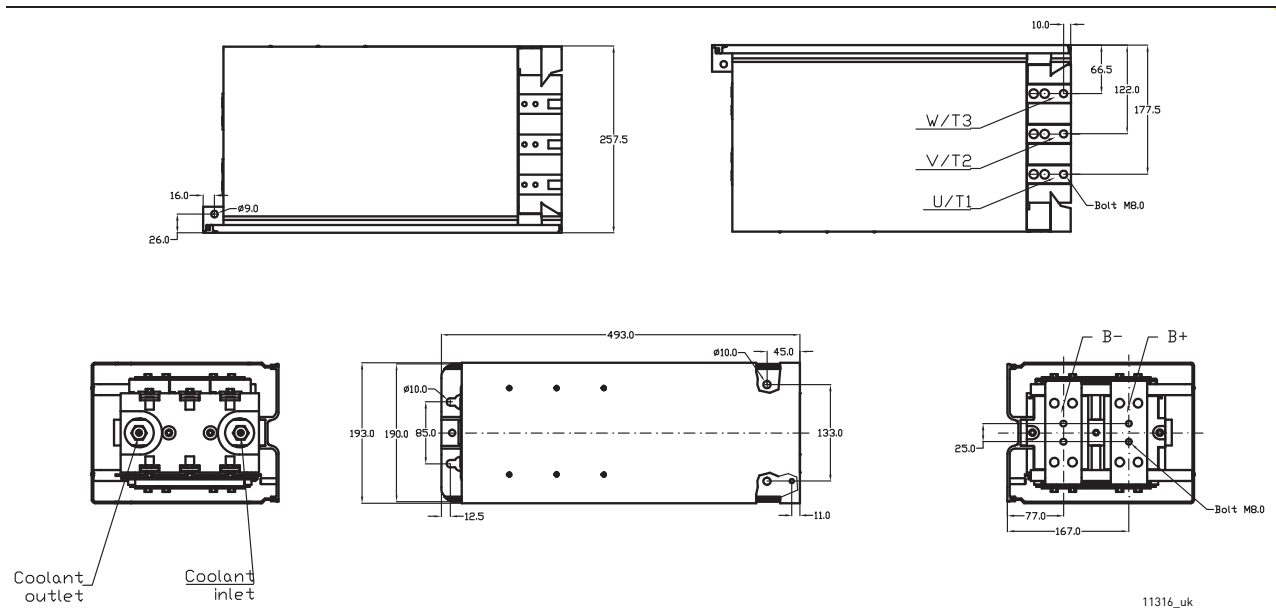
VACON® NX Liquid-cooled drive dimensions (inverter), CH4
